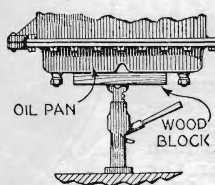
How a jack can be used to aid in removing or replacing the oil pan of your auto engine
